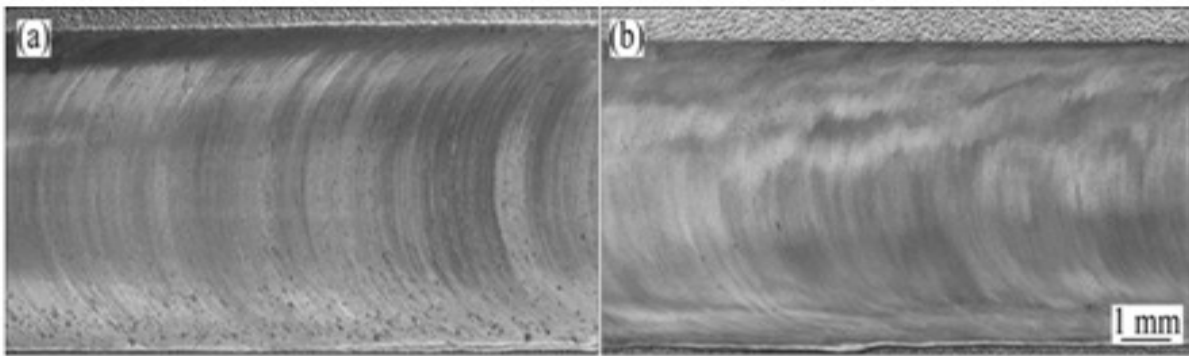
Weld appearances formed under different welding conditions: (a) Normal weld; (b) Underwater weld[32]
